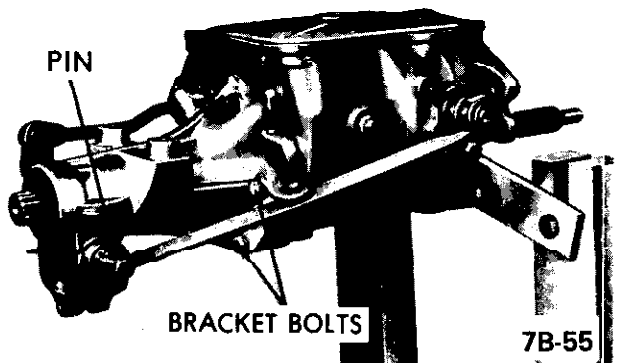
B-21 Pin and Bracket Securing Selector Lever to Intermediate Shaft and Rear Bearing Retainer
